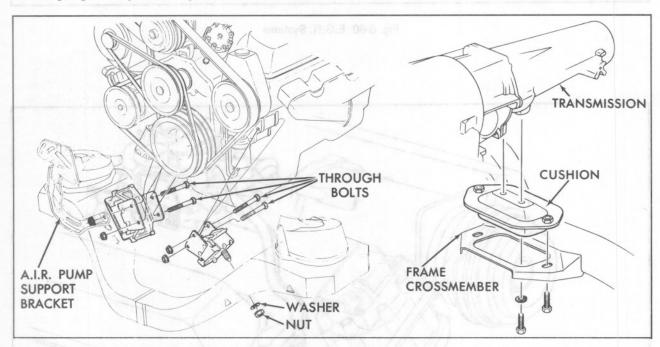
Engine and Transmission Mounts - "C" Car
